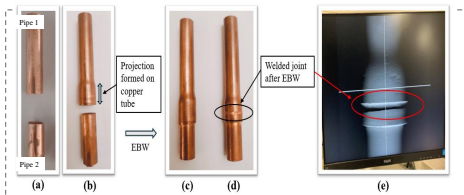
Process flow for Electron Beam Welding (EBW) of copper tubes: (a) Plain copper tubes (b) Tubes after projection forming for alignment (c) Assembled samples prior to welding (d) Copper tubes after EBW showing the welded region (e) Radiographic image showing the weld profile after EBW.
